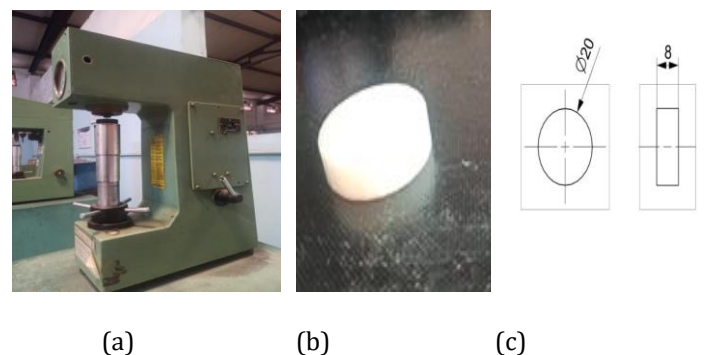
(a) Rockwell Hardness testing machine (b) prepared sample (c) sample dimensions
